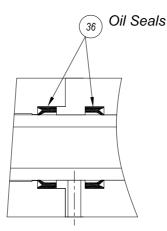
Fronthead/Extension Oil Seal [36] Fitting
